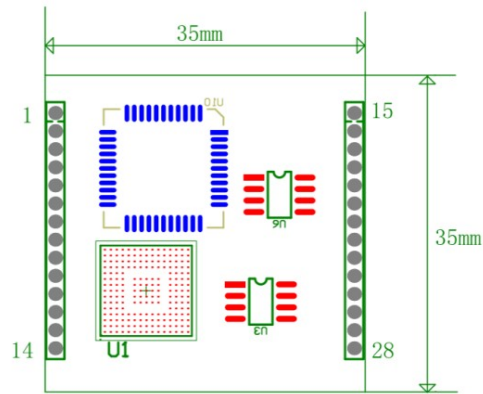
Built-in core board module equipment dimensions (unit: mm)
